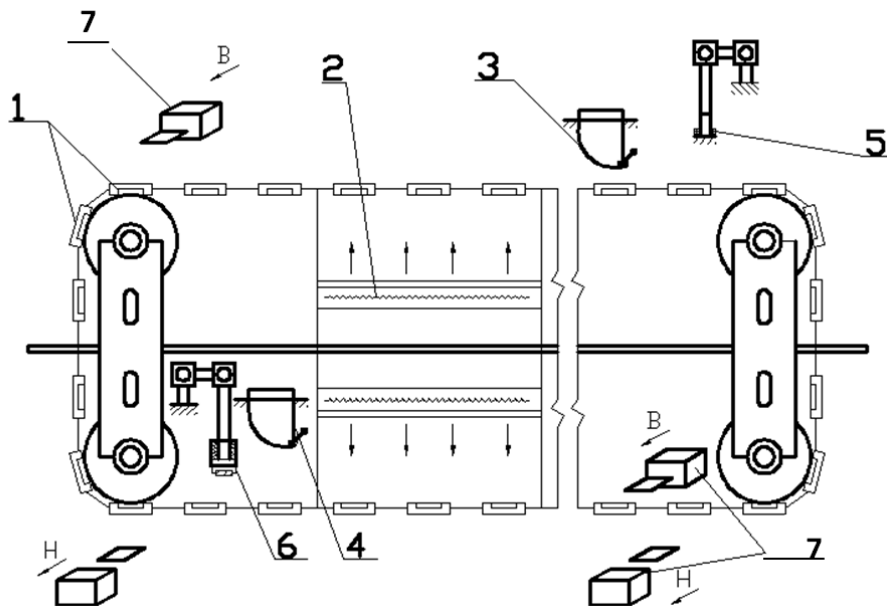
The principal scheme of the line for baking products with filling: 1 – the line; 2 – the heating element; 3 – the dough dispenser; 4 – the filler dispenser; 5 – the mold preparation mechanisms; 6 – the mold removal mechanism; 7 – the pusher
